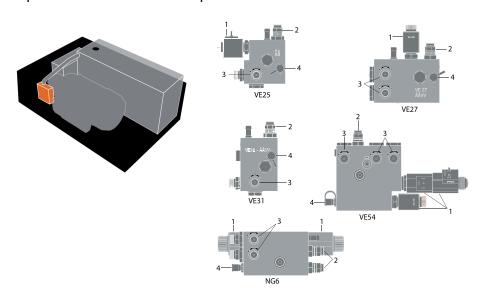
The valve package is mounted on the hydraulic power pack. There are different types of valve package depending on the product and its configuration
